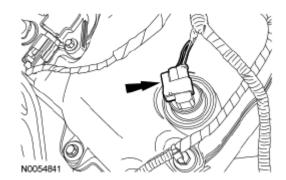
Locating RH Variable Camshaft Timing Solenoid Electrical Connector Courtesy of FORD MOTOR CO.
